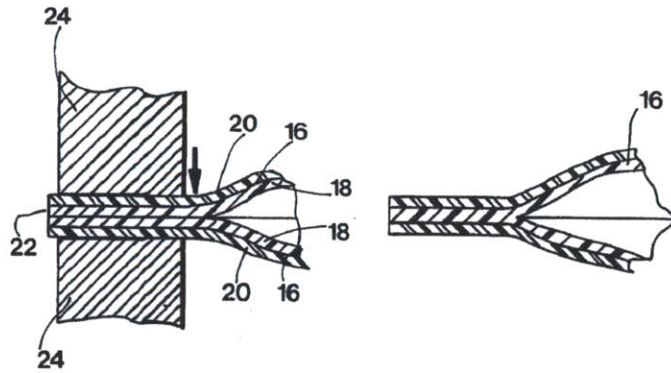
Exit seals using radio frequency welding allows wider manufacturing tolerances [27]
